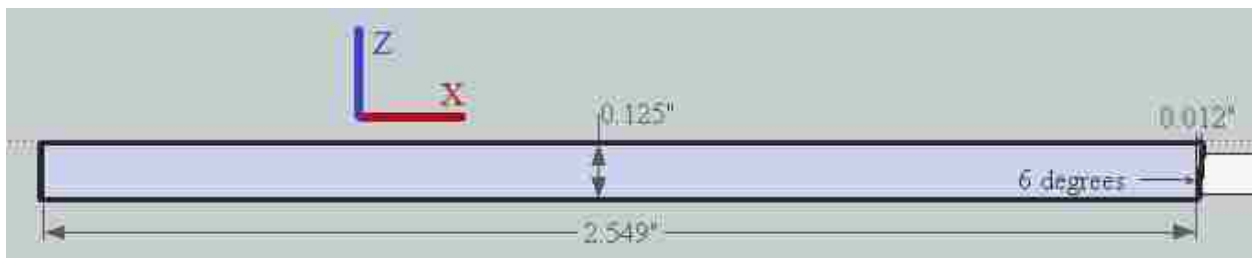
Cross sectional view of the 10x10 cm² upper trimmer aluminum plate in the cross-plane dimension illustrating the thickness and lateral dimensions of the plate.
